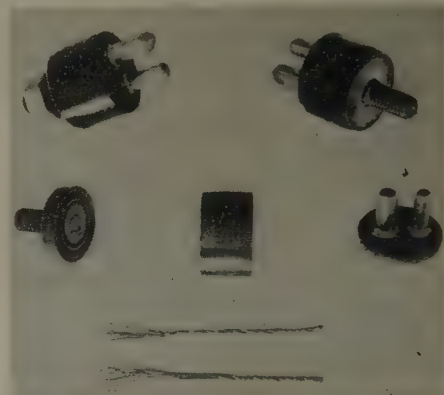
An exploded view of the transistor, with two completed units above. Araldite type D is used to fill the case.
